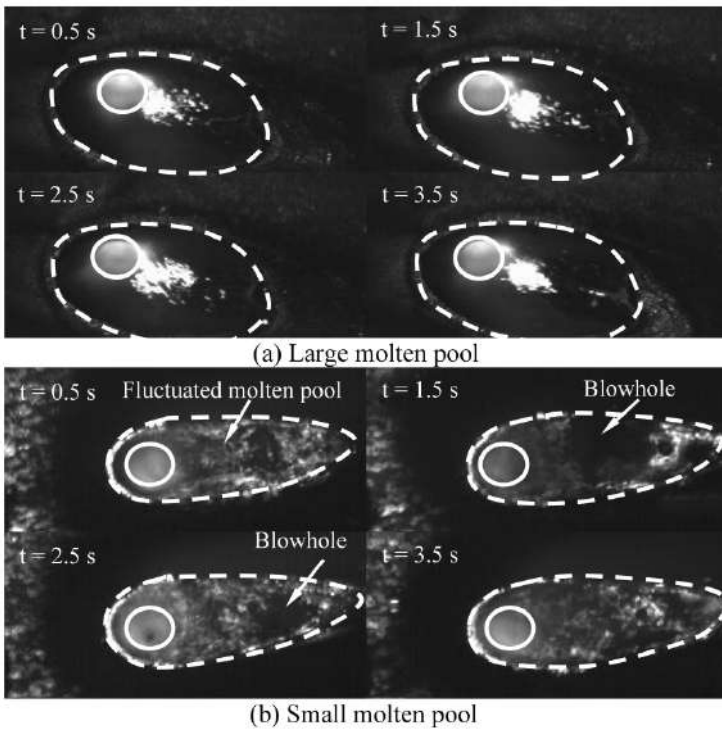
The dynamic behavior of the molten pool acquired under different welding parameters: (a) laser power of 1.5 kW, welding speed of 5 mm/s, and (b) laser power of 4.0 kW, welding speed of 30 mm/s at different time steps during the welding process
